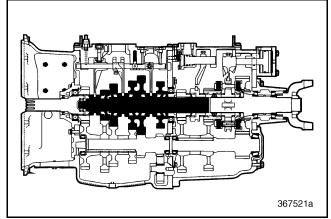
Front Mainshaft Component Locator (T313L21/T318L21 Shown)
